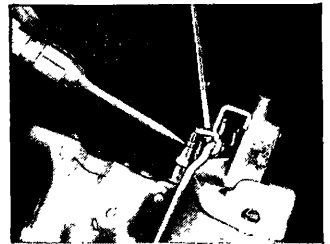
Install anti-percolator valve. Seat tightly. Adjust lip on pump arm so indicator line is flush with top of anti-percolator. Then install metering rod
